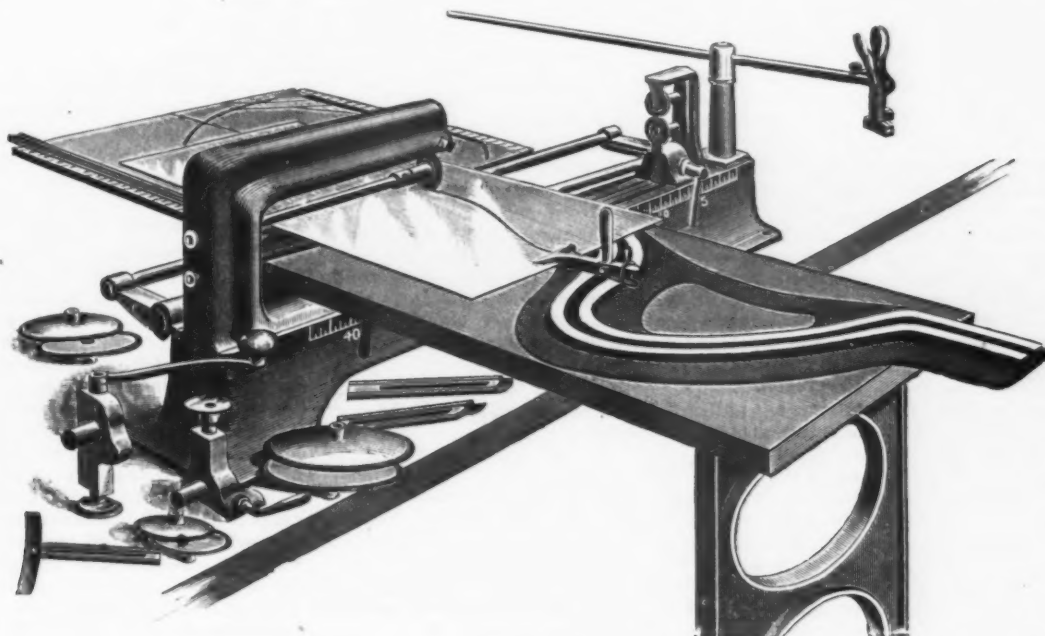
Complete Machine with Elbow Cutting Attachment.
